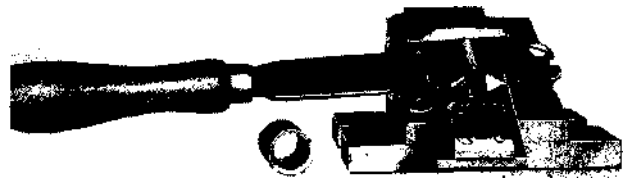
Fixture for Holding Bushings when Milling Oil-groove
